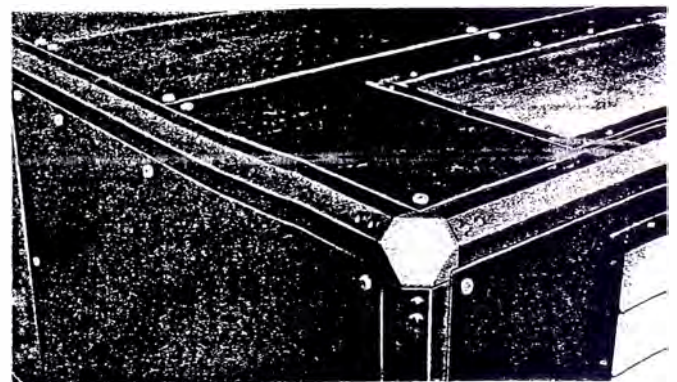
REMOVABLE TOP & SIDE PANELS
